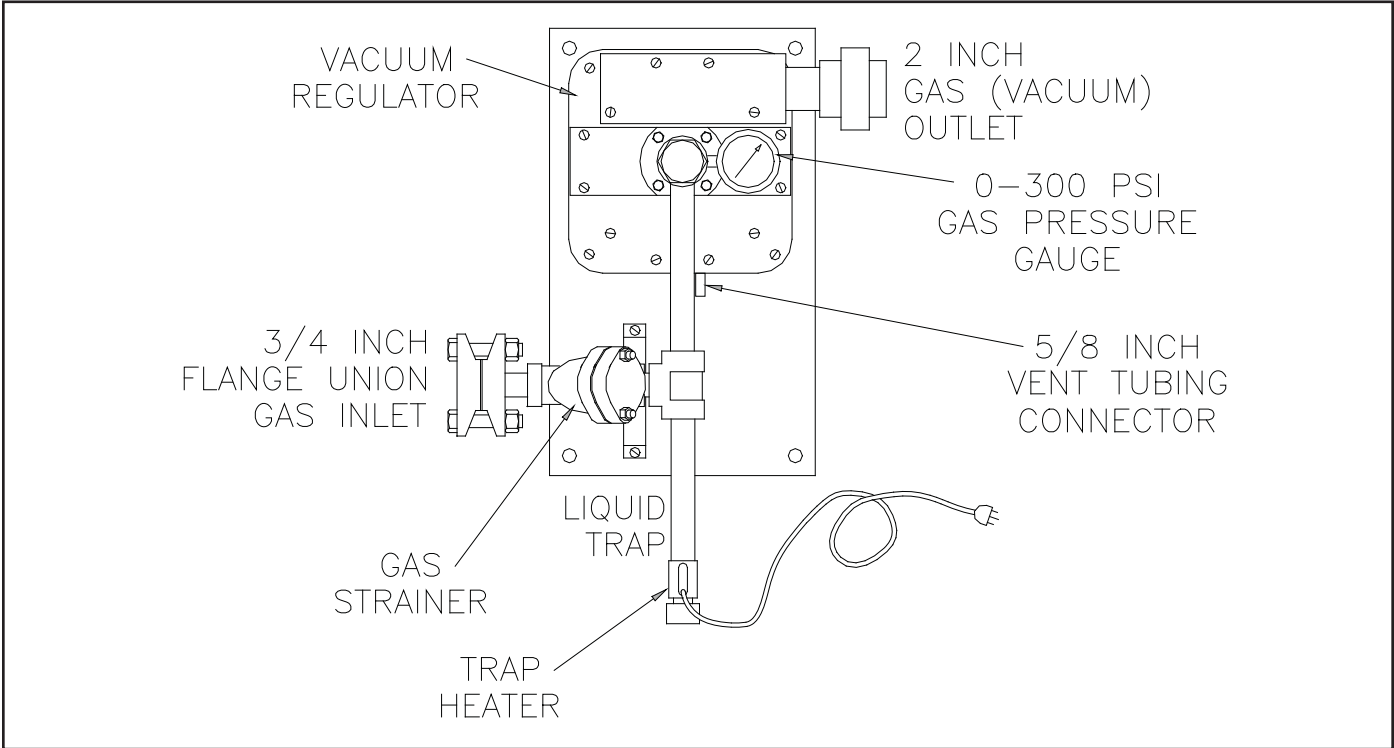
10,000 PPD (200 kg/h) Vacuum Regulator Assembly
